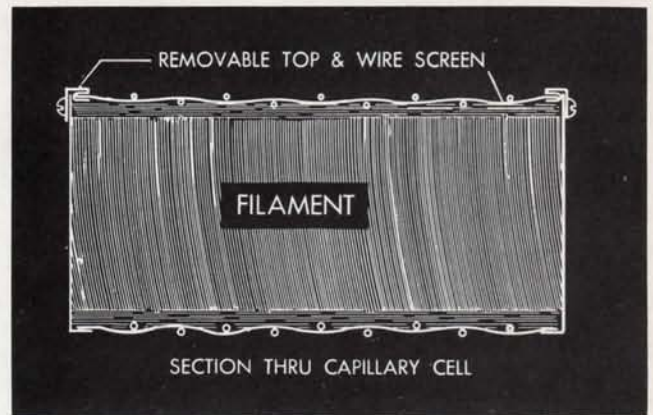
Sectional drawing, showing details of construction of Capillary cell.
